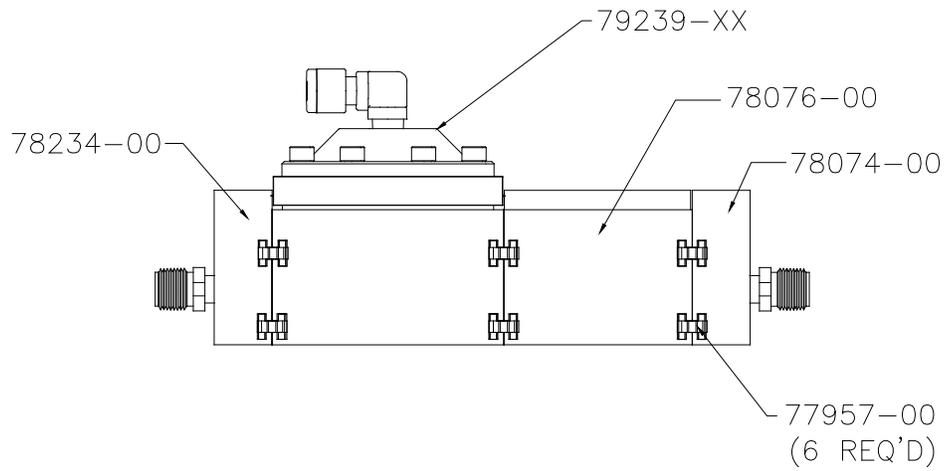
78235-00 Regulator & Flow Meter Stand-Alone Assembly
